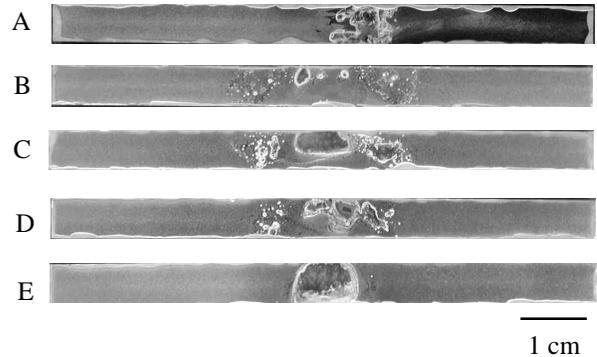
Immersion test on FSW 2024-T351 with different welding parameters after 24 hr exposure in 0.1 M NaCl.
